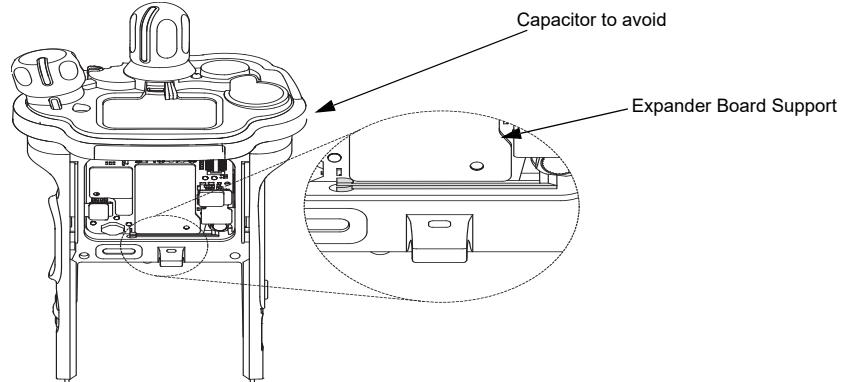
Pull Expander Board Support (Opt. Expansion Board)
